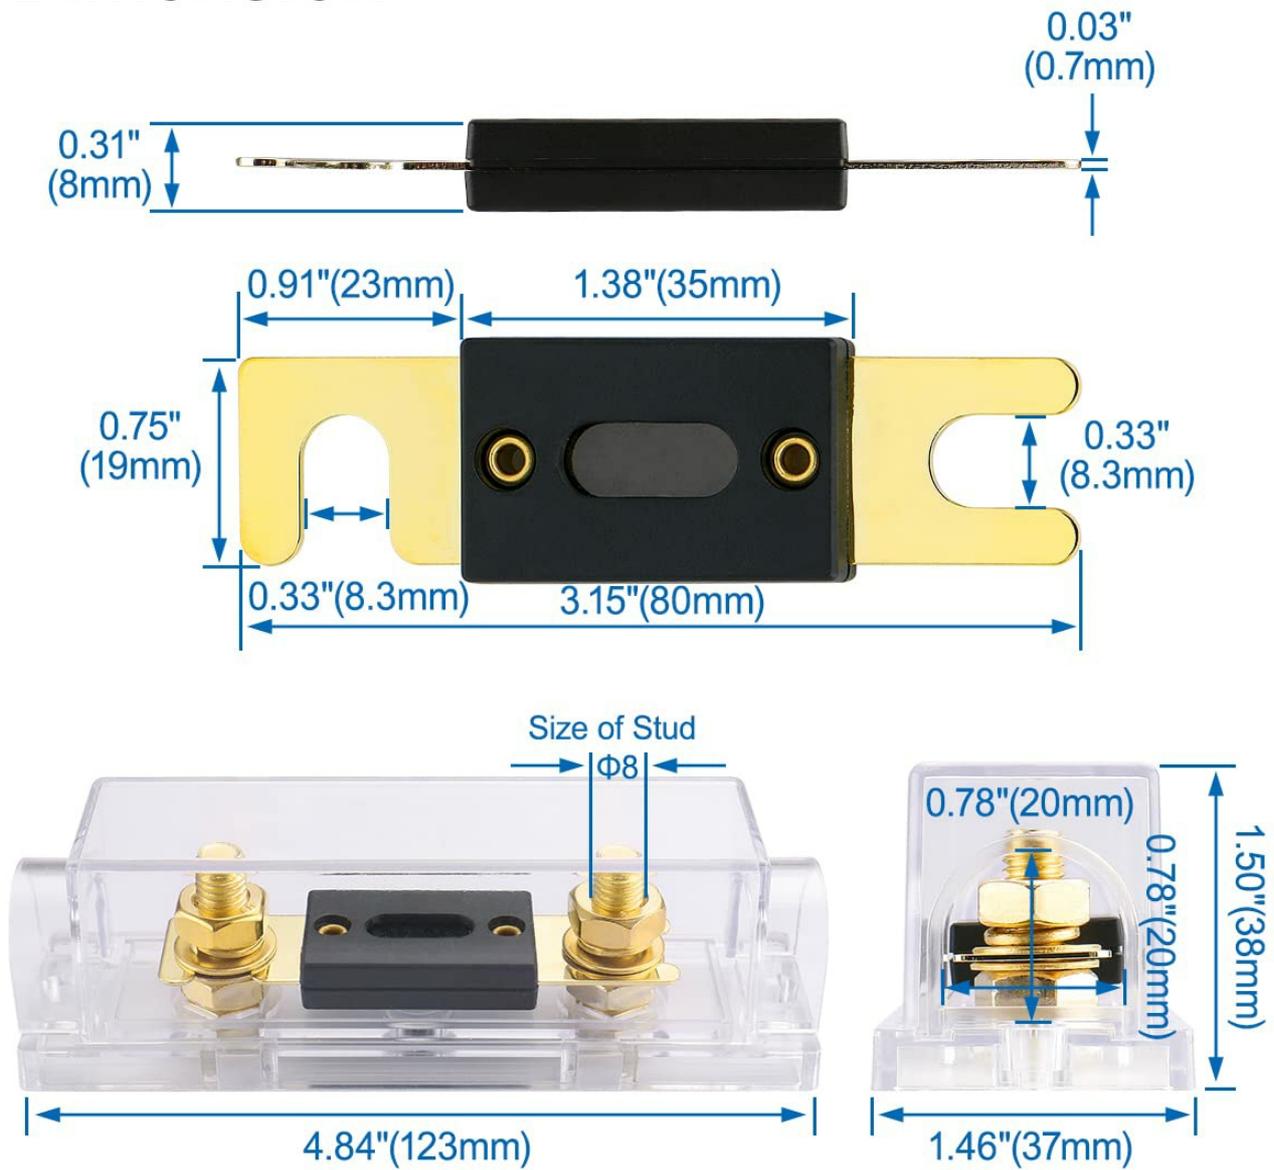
Dimensional drawing of the fuse holder and ANL fuse.
